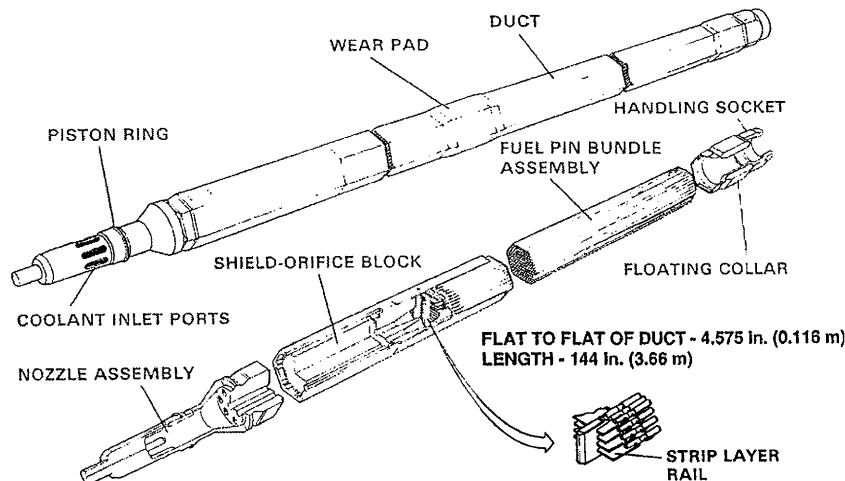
Schematic of a series I FFTF driver fuel assembly [65].
